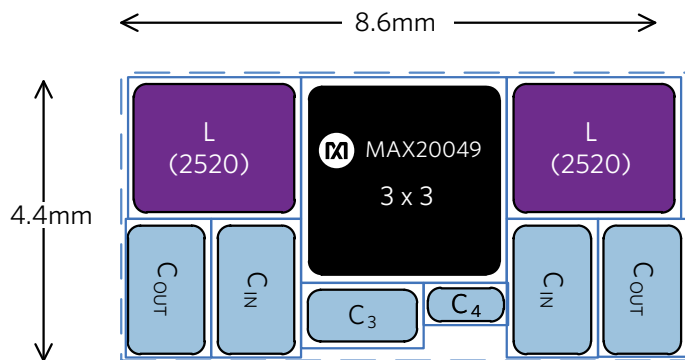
Smaller PCB Size with MAX20049 (37.8mm²)
